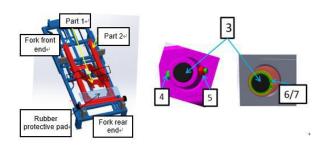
Installation of first layer fork 1. First inner wall assembly 2. First outer wall weldment 3. Pin 4. Bolt 5. Nut 6. Washer 7.
